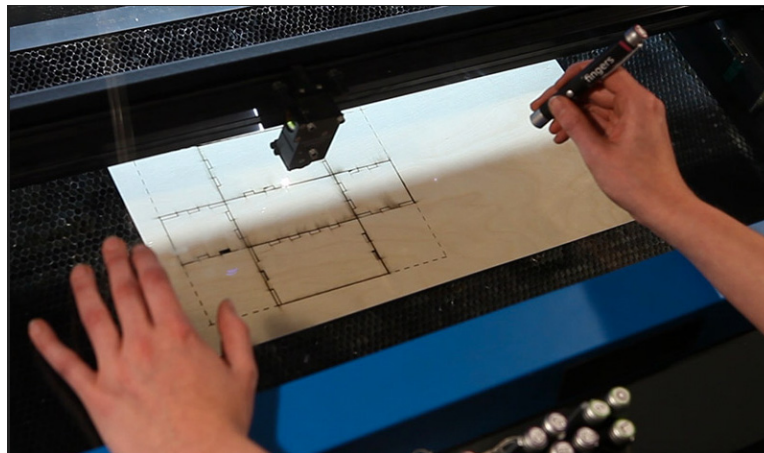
In *constructable* [Mueller et al., 2012], users draw with a laser pointer onto the workpiece, the laser then cuts the path. *Constructable* offers functionality to achieve precise mechanical constructions, such as the gearbox being constructed in this image.
